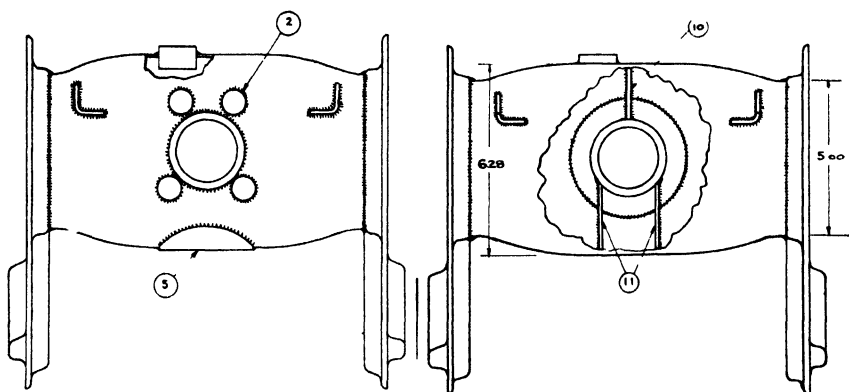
(left). Top view of landing gear support with cut-away to show welding of a support. Fig. 10. (right). Top view of landing gear support with cut-away showing welding of webs on gussets.
